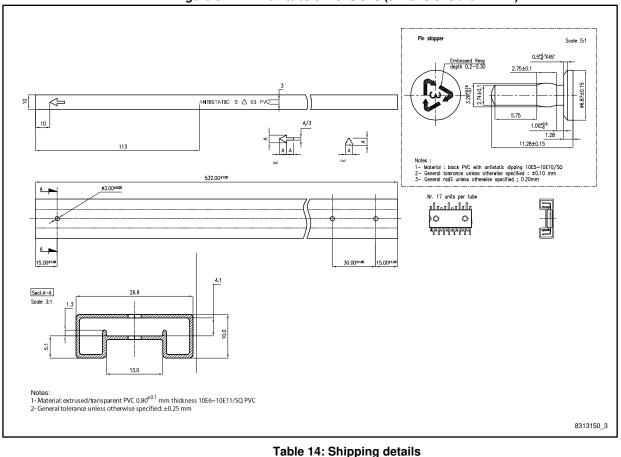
NDIP-26L tube dimensions (dimensions are in mm)
